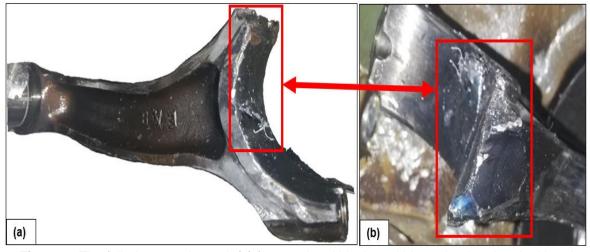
The failed connecting rod; (a) fractured and blackened big-end rod and melted bearing; (b) a closer view of the fractured point showing heat tinting.
